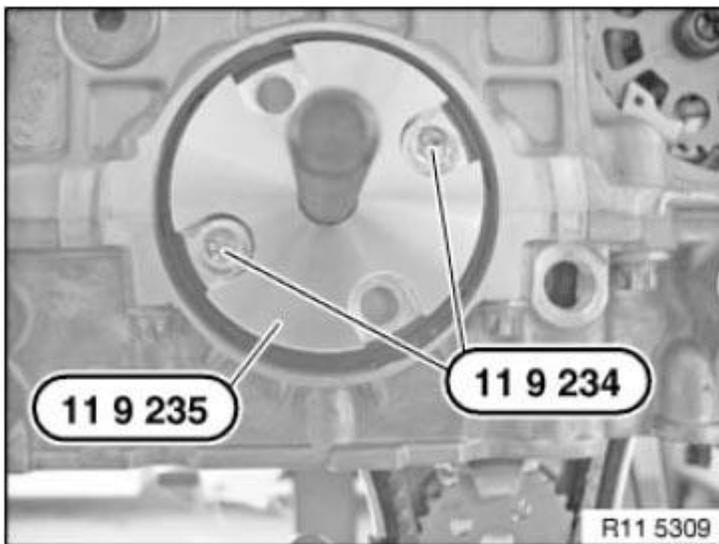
Mounting Special Tool 11 9 235 With Special Tool 11 9 234 On Crankshaft
